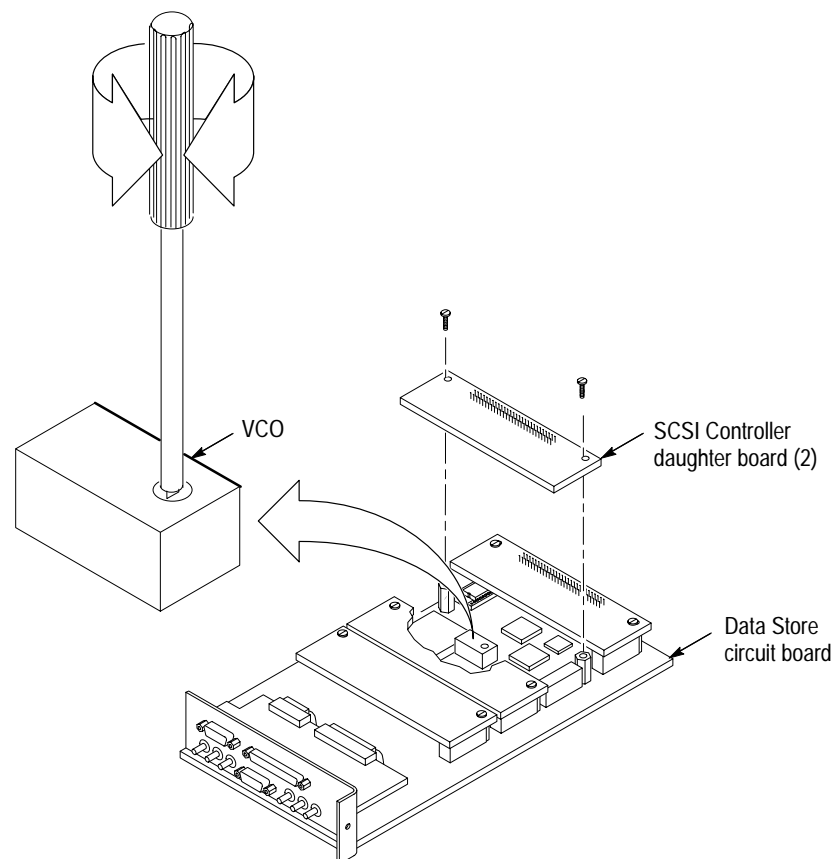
Location of VCO on the Data Store circuit board with SCSI Controller Daughter circuit board removed
